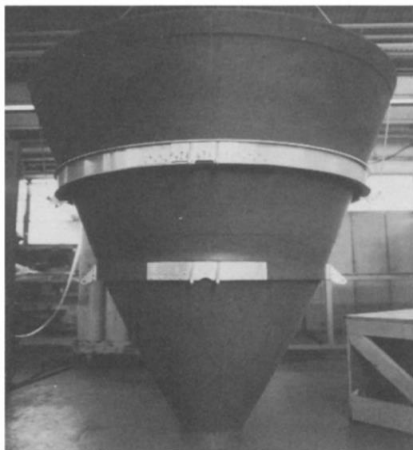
Rocket motor 2-D CC exit cone assembly [2]
